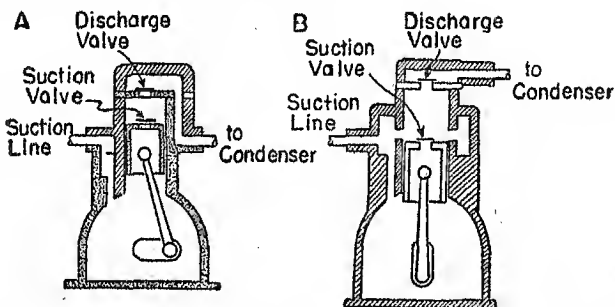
Suction Valves May Be in the Top of the Piston, with Discharge Valves in a Valve Plate.
